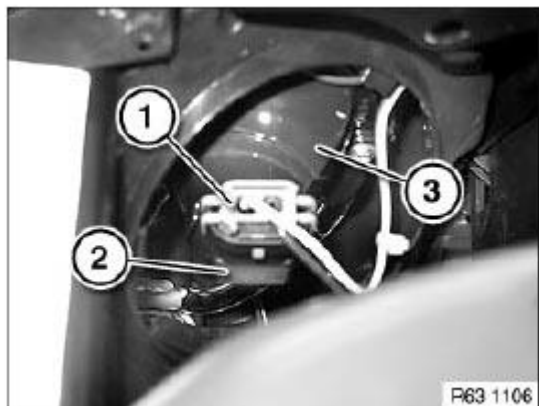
Identifying Bulb, Plug Connection And Bulb Holder
